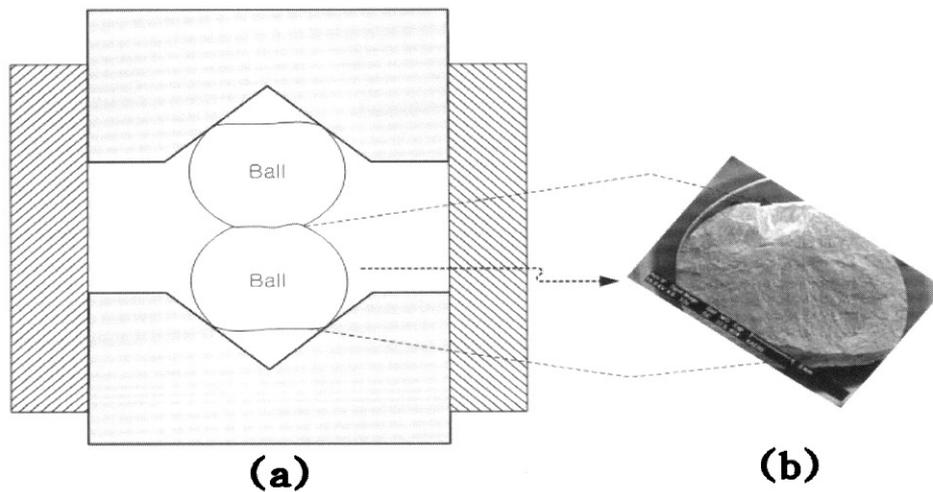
(a) Schematic of ball shape after breaking test. (b) fracture surface after breaking test.
